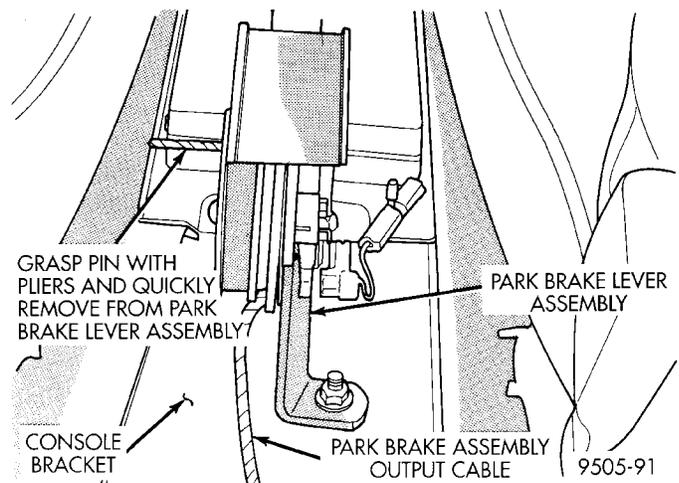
Removing Lockout Pin From Park Brake Lever Assembly
